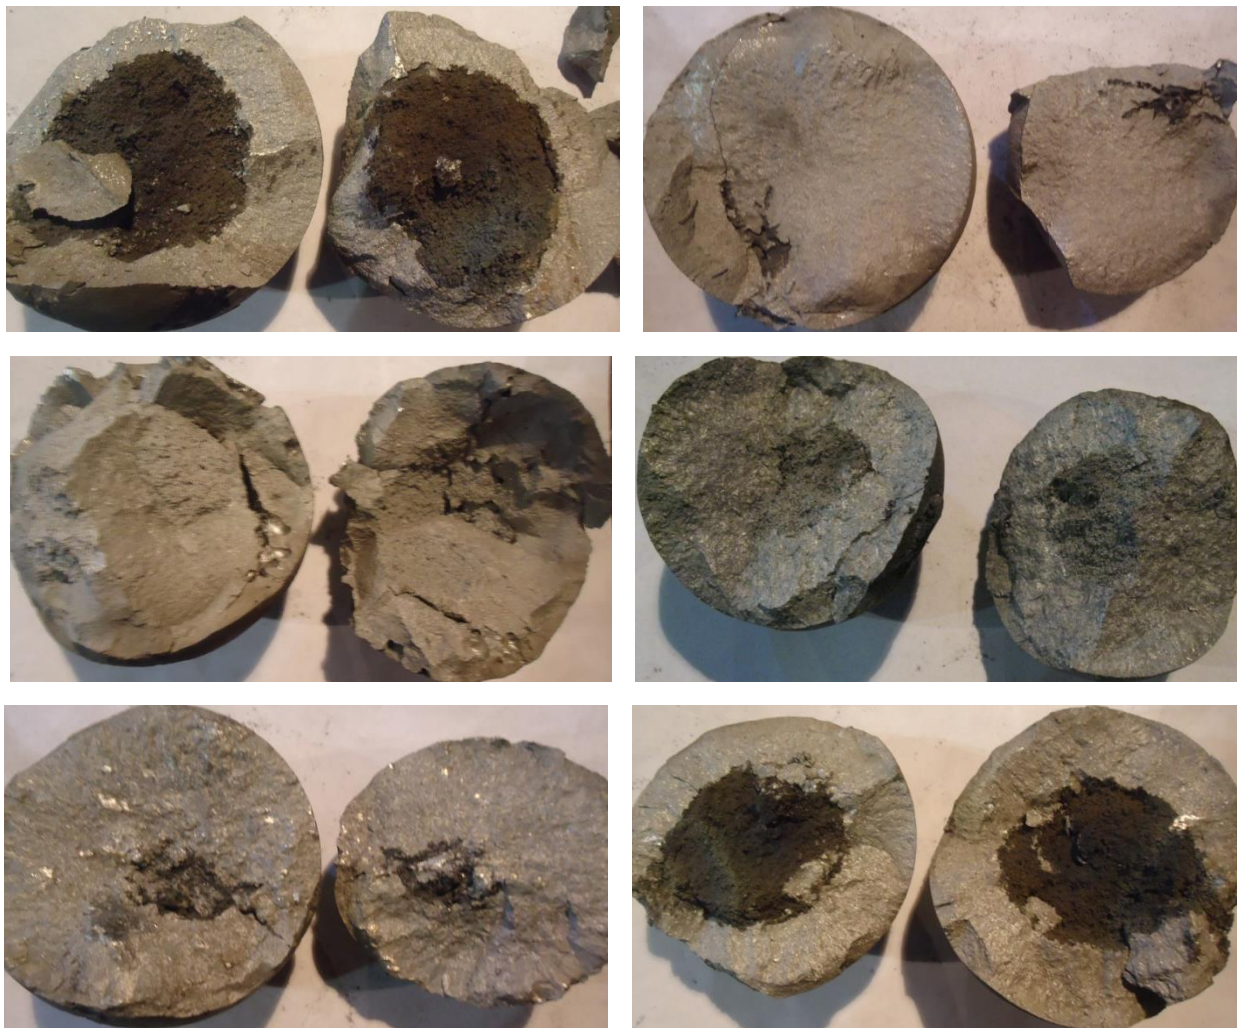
Cast iron balls with internal casting defects, after being destroyed on impact copra
